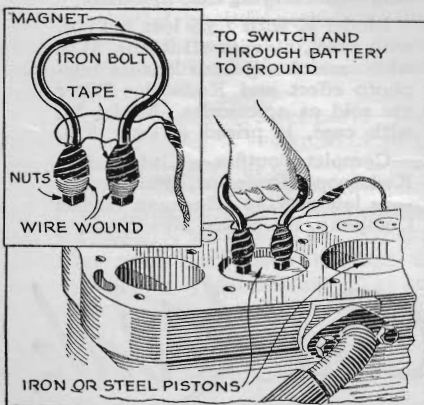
An iron bolt is bent into horseshoe and wound to form a magnet to test iron pistons.
